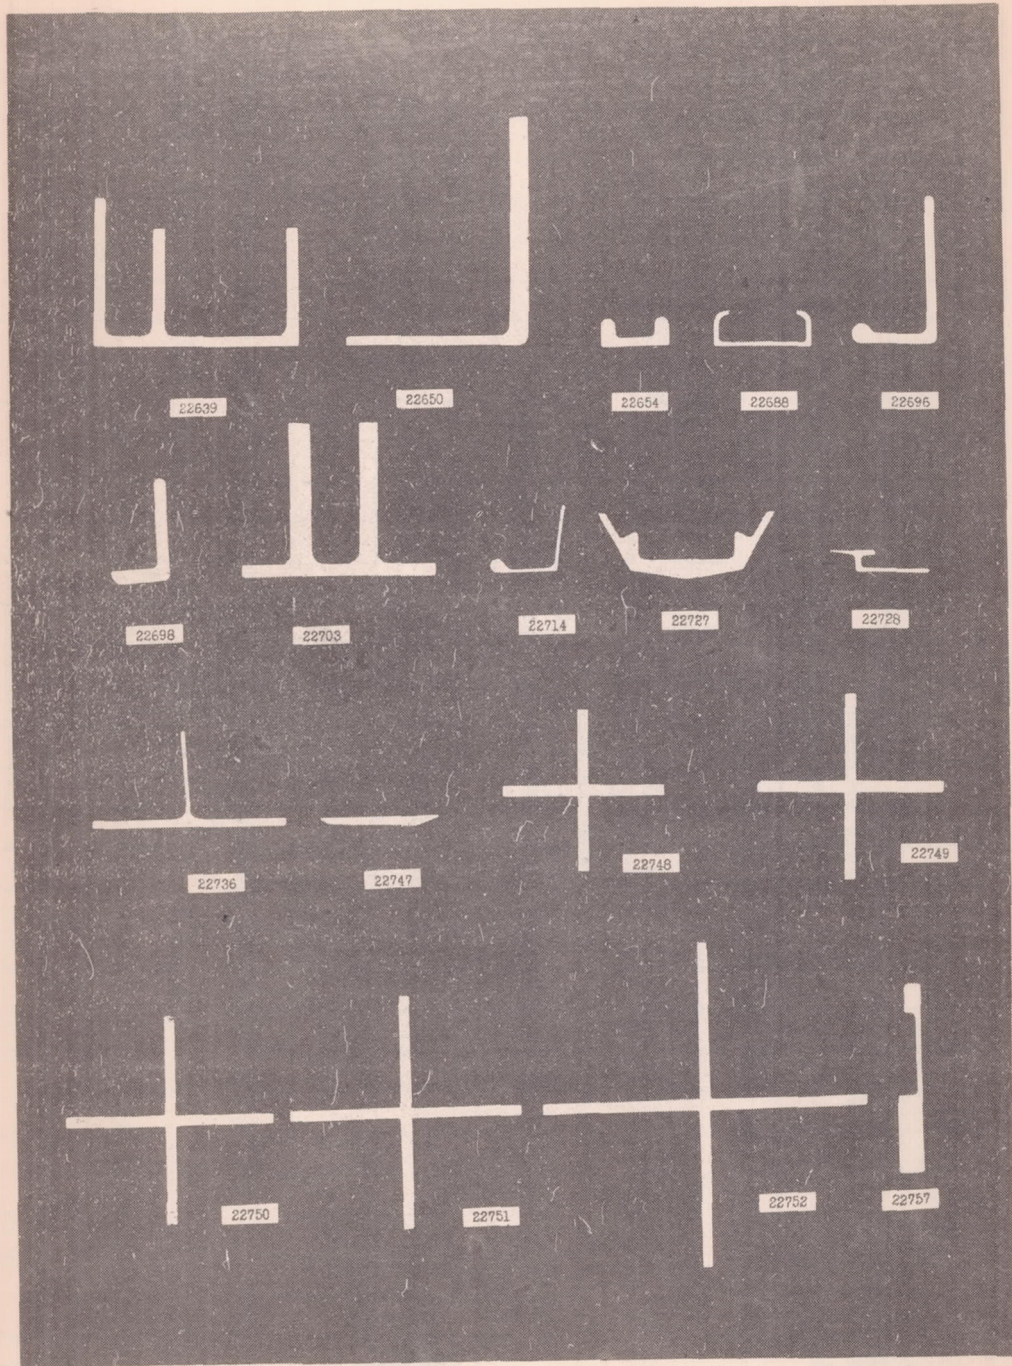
Cross sections of 24S-T Extruded Shapes Tested -
